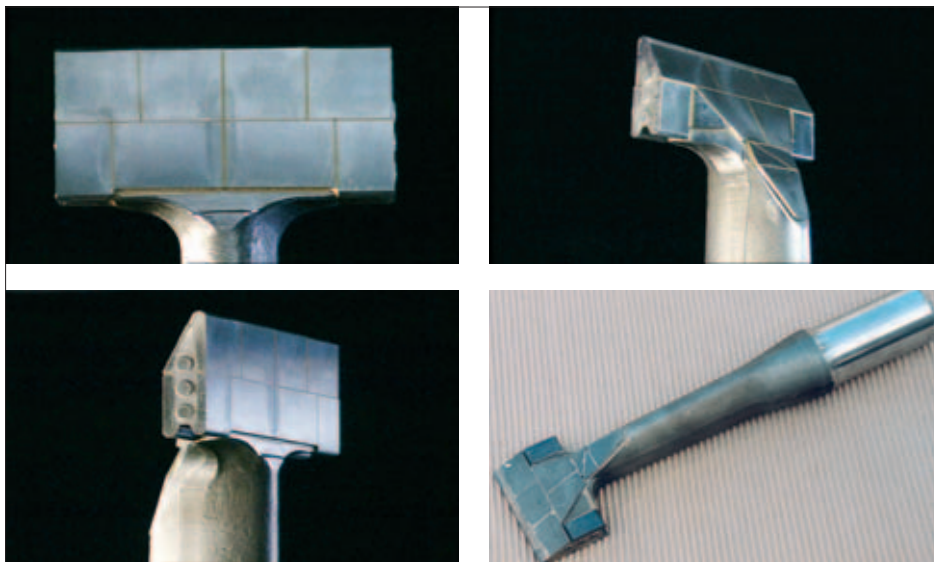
Plasser tungsten-carbide tamping tine. Top left: tine plate, top right: conical-shape rear side of tine. Bottom left: penetration edge and side surfaces with brazed tungsten-carbide inserts, bottom right: tungsten-carbide tamping tine
